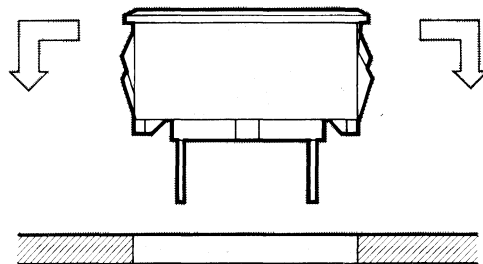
Installation of the Light Bar/Panel Mount Assembly into a Front Panel
